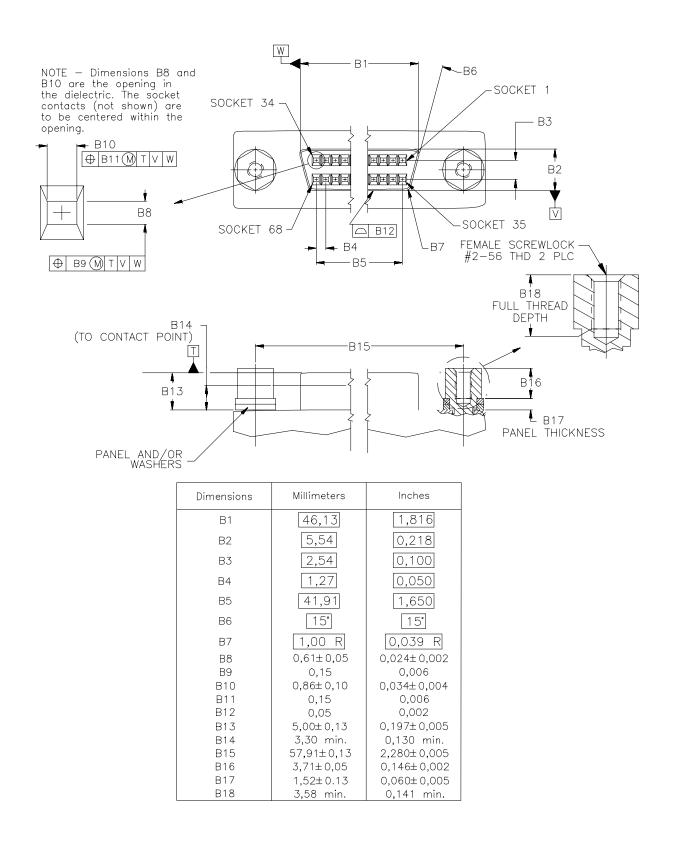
68-contact alternative 3 shielded SCSI device connector (P cable)
